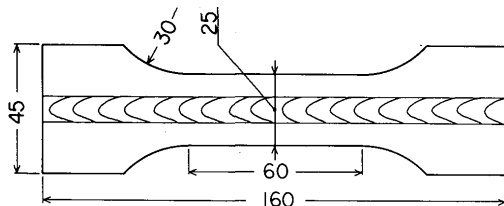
Shape and size of a specimen for examining features of tensile cracks
